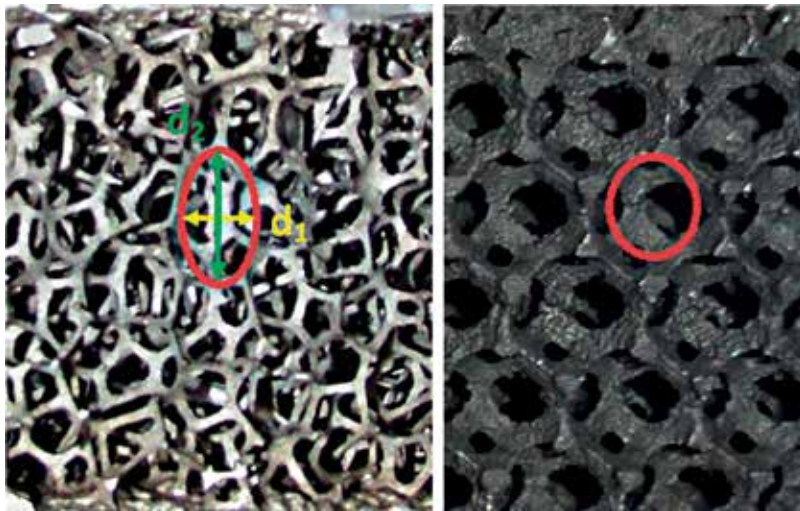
Open-cell metal foams formed by: Investment casting (left); (b) leachable bed casting (right).
